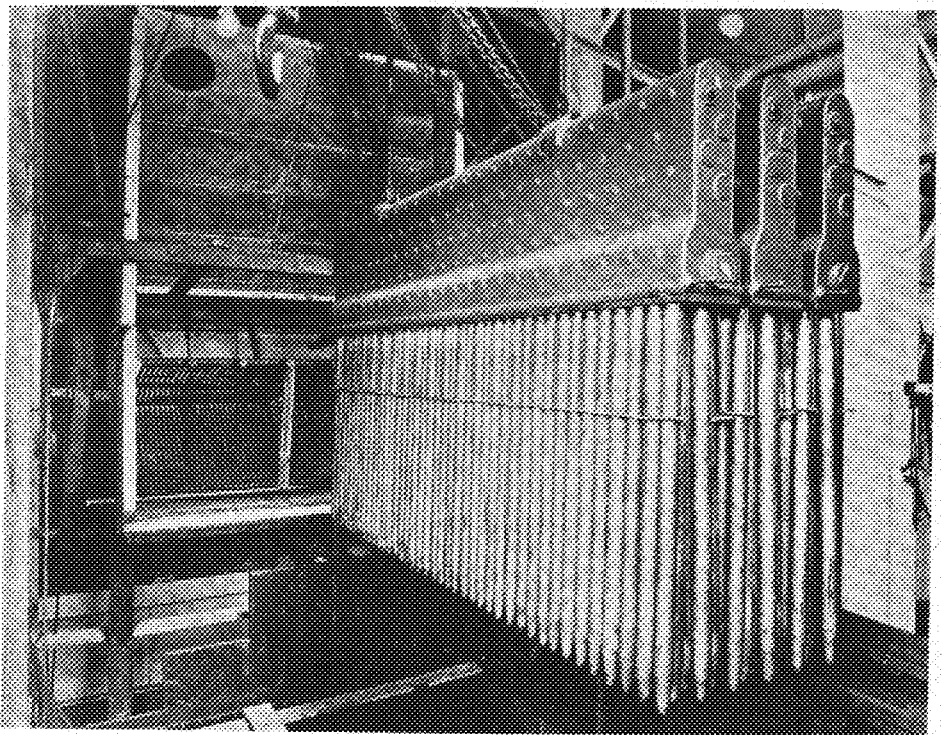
MERCURY BOILER UNITS PARTLY ASSEMBLED OVER FURNACE
